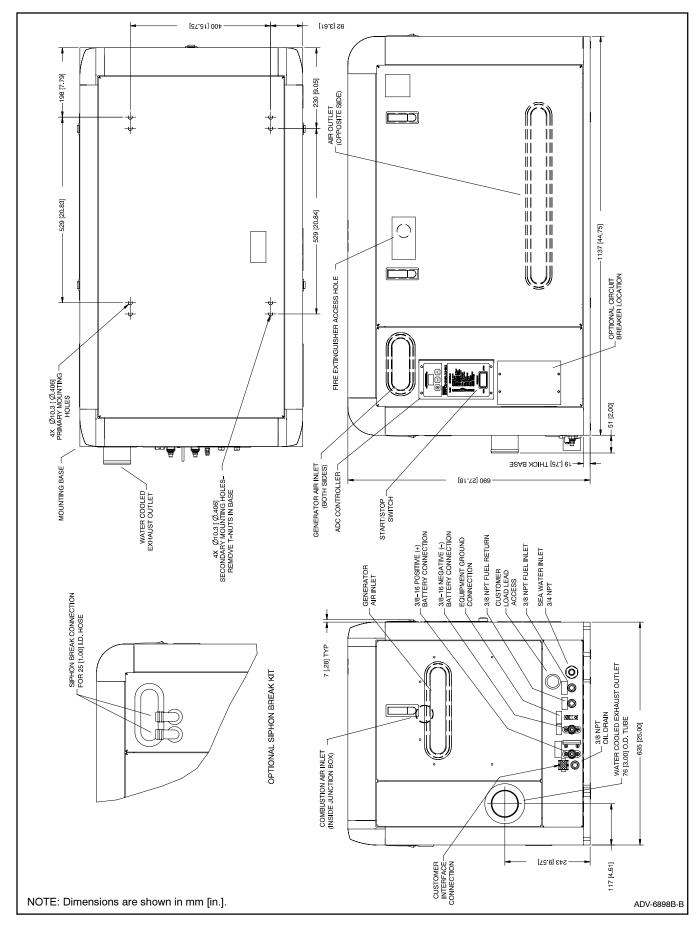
Dimension Drawing, 20EOZD and 17/17.5EFOZD with Sound Shield
